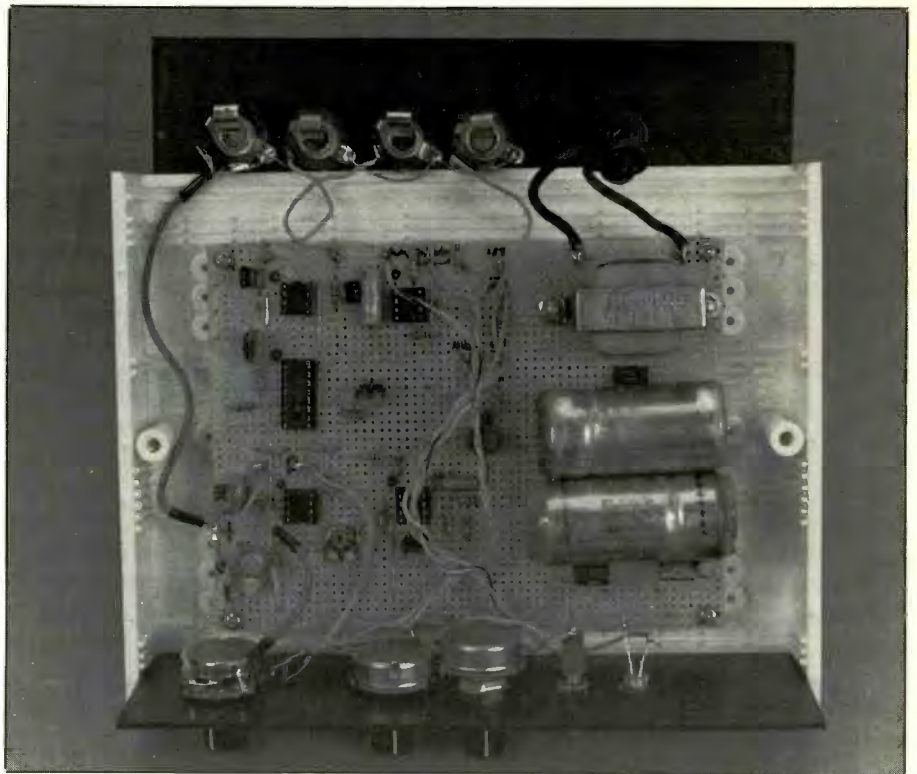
Interior view of assembled prototype. Note clean layout of components both on and off the board.
